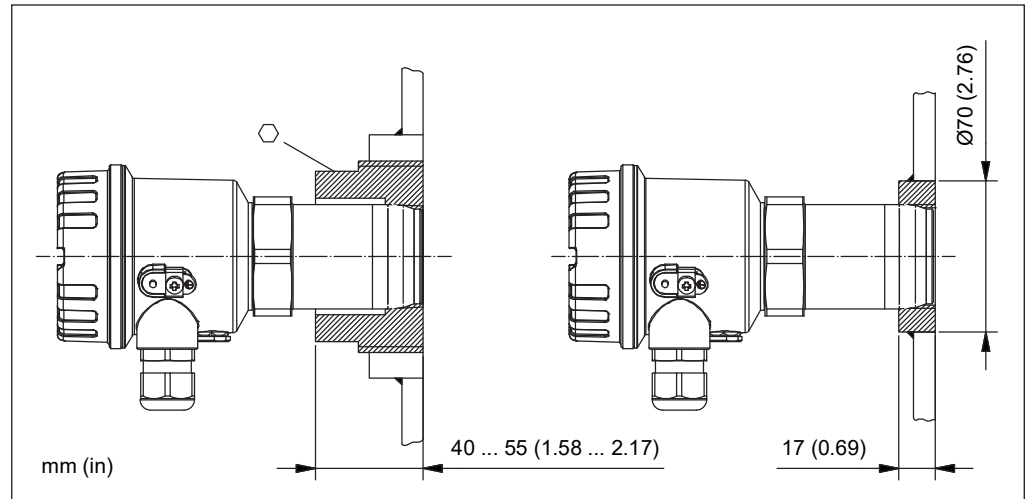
FAR52 weld-in or screw-in adapter
